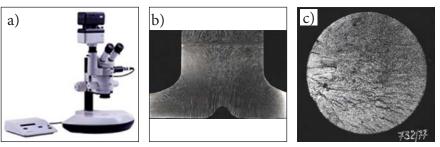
Examples of a) microscope for macroscopic tests(photo by Leica Microsystems), b) macrostructure of a friction-welded joint, c) fatigue fracture of a friction-welded roller
